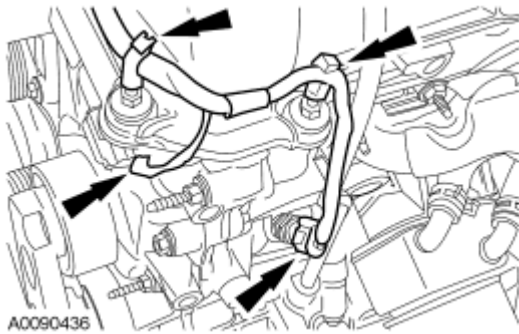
Locating Camshaft Position Sensor (CMP) & Oil Pressure Sensor Electrical Connectors & Wiring Retainers
